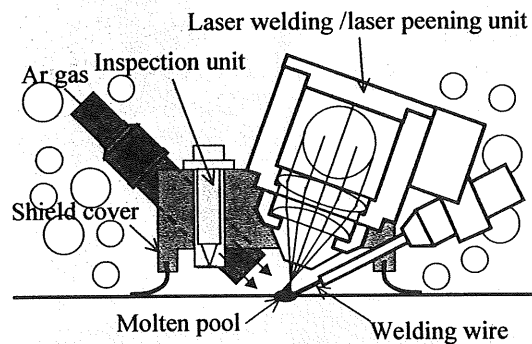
Schematic of under water laser welding with multifunction laser welding head
